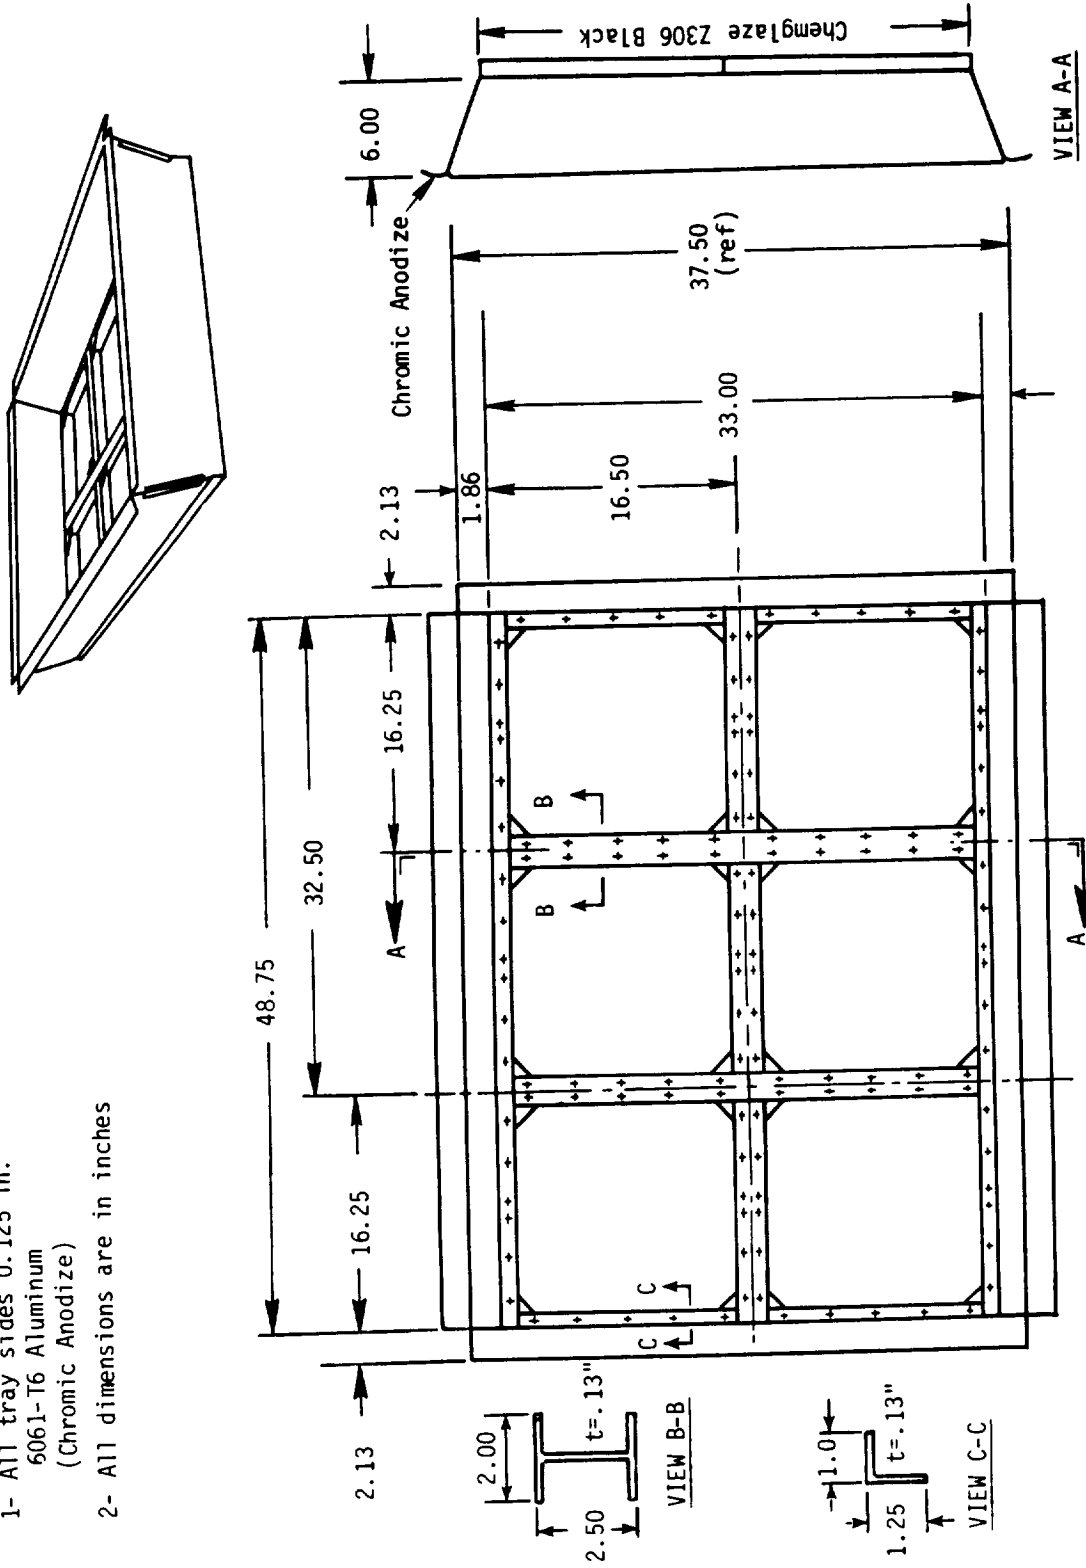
LDEF Peripheral Tray Assembly - 6 Inch Tray
